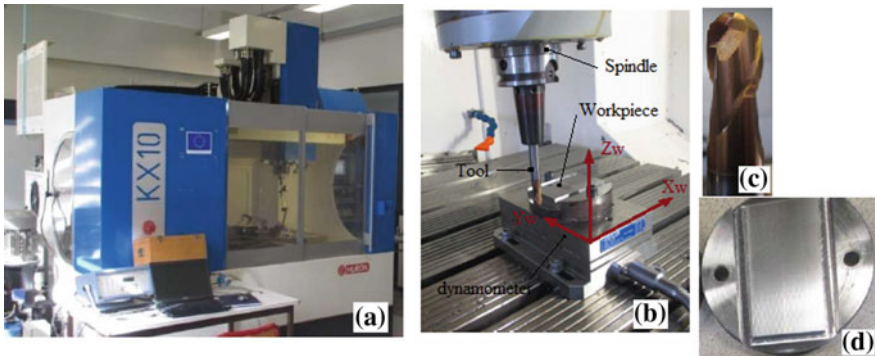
a Milling machine, b experimental setup, c ball end mill cutter, d image of machined surface
